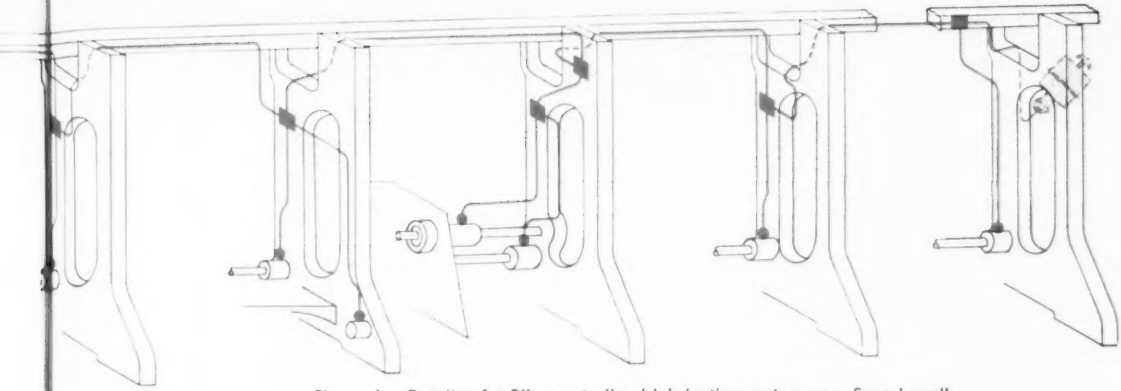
Details of a Bijur centralized lubricating system on a Saco-Lowell roving frame, serving both head-end and other bearings.
